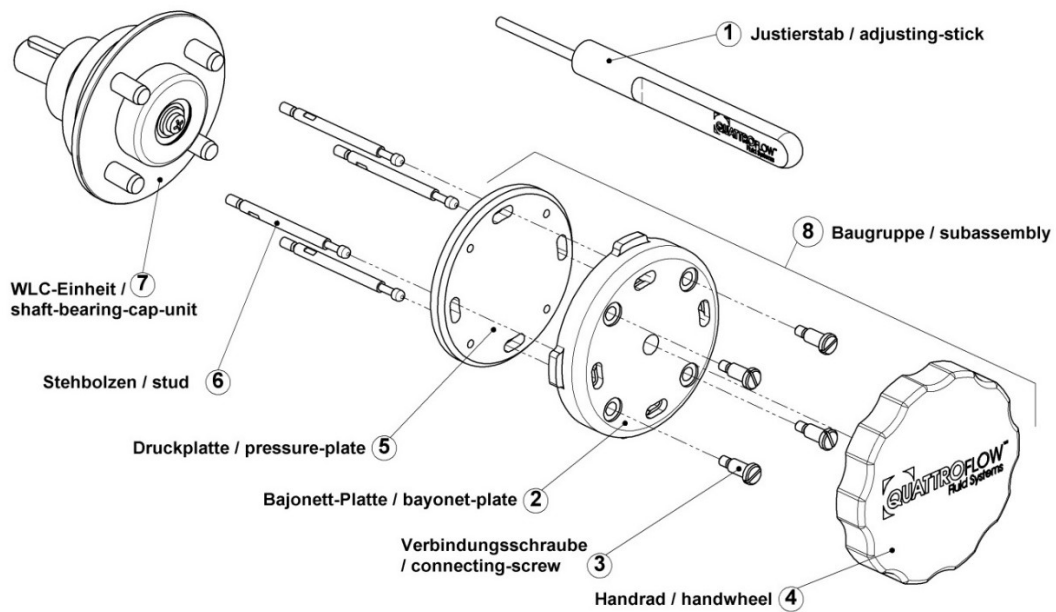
Components of EZ-Set shaft-bearing-unit and pressure plate with hand wheel
